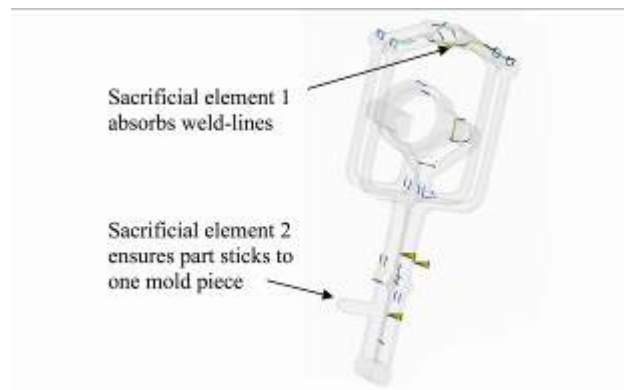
Weld-line locations for three gated mold with sacrificial elements
